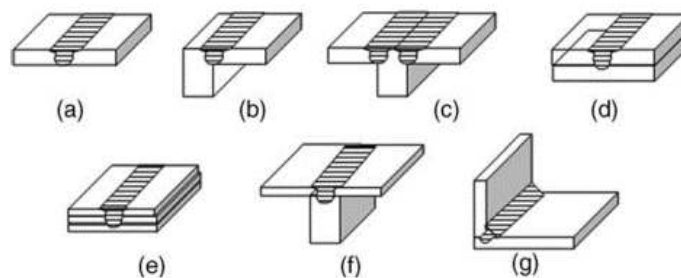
Joint configurations for friction stir welding: (a) square butt, (b) edge butt, (c) T butt joint, (d) lap joint, (e) multiple lap joint, (f) T lap joint, and (g) fillet joint [38]
